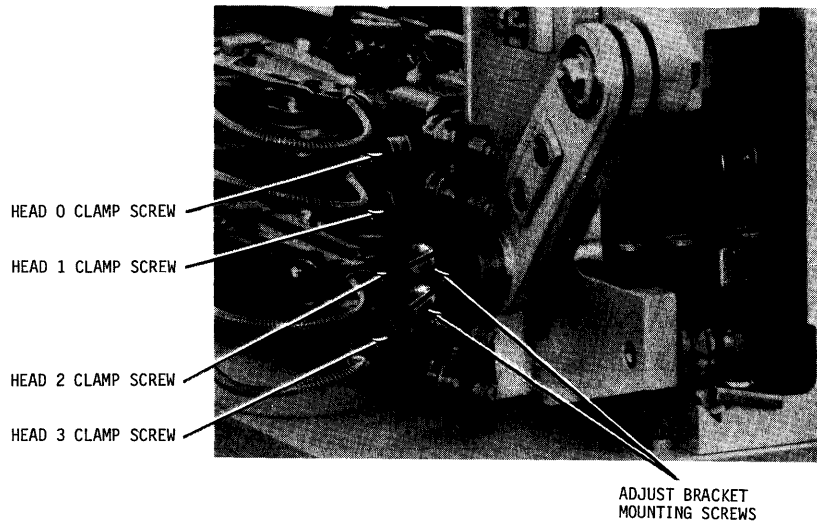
Mounting Screws for Head Clamps and Adjusting Bracket
